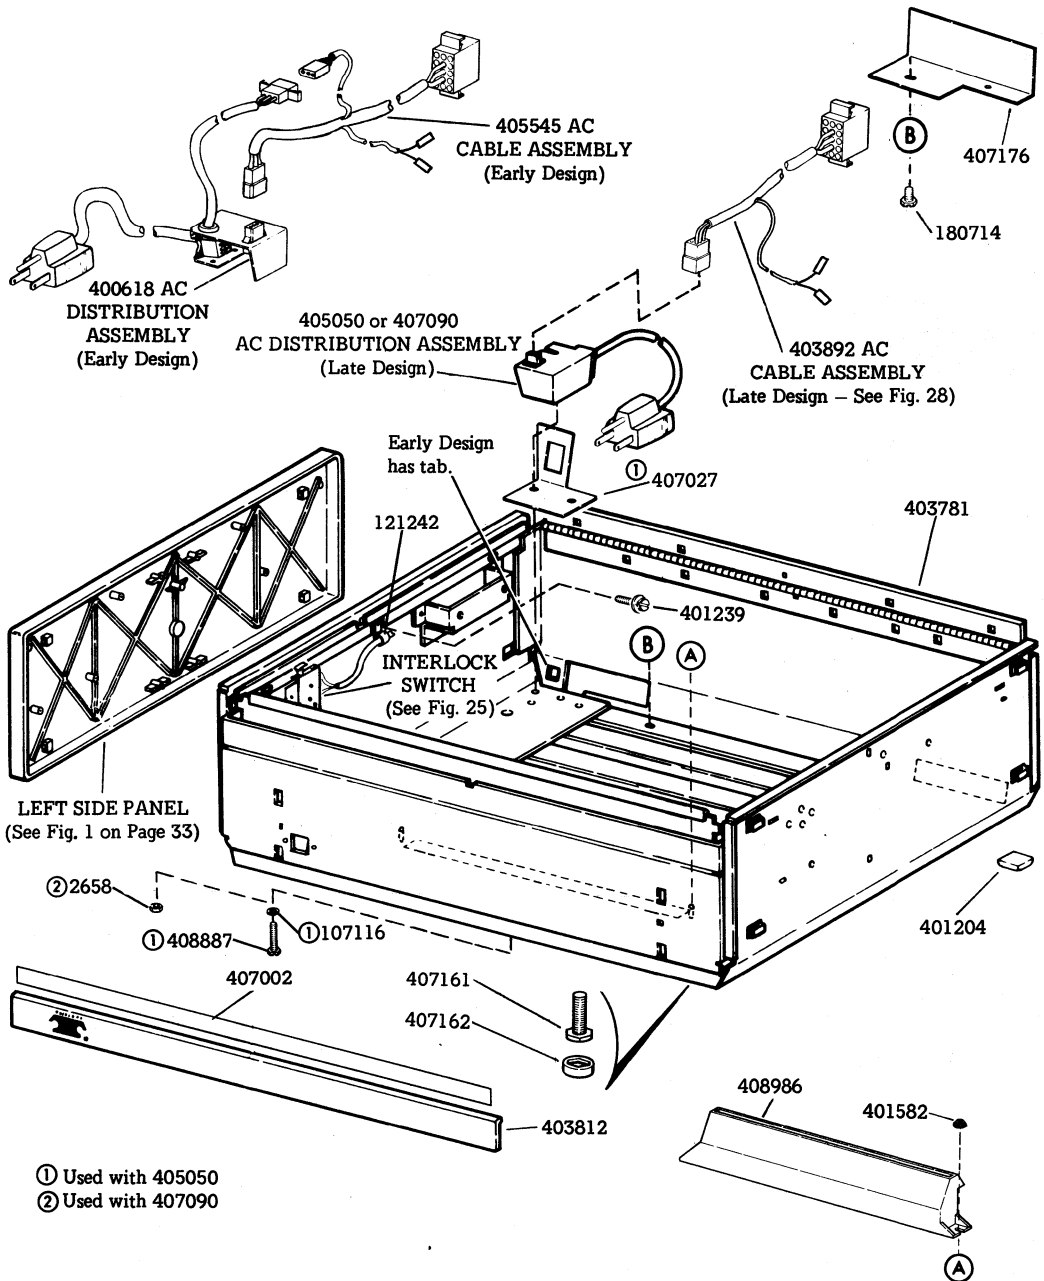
CAB351/YZ Printer Cabinet Core for Adjacent or RO Tractor Feed Printer - 80-Column
